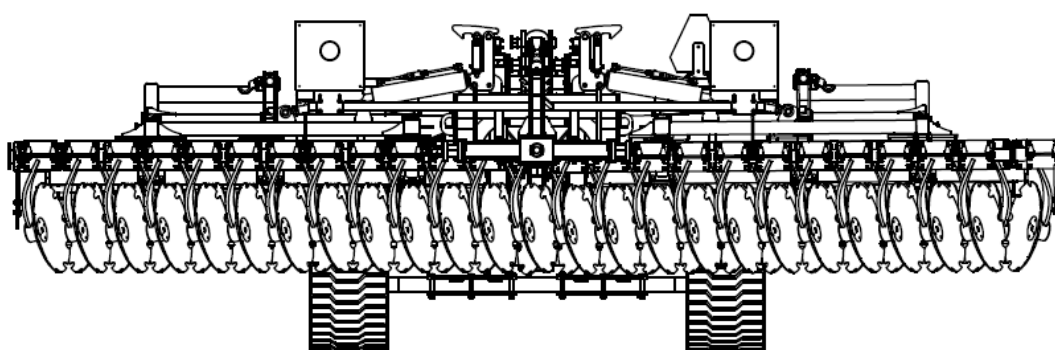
View of the machine at the end of the wing opening sequence. The arms of the machine are fully open.
